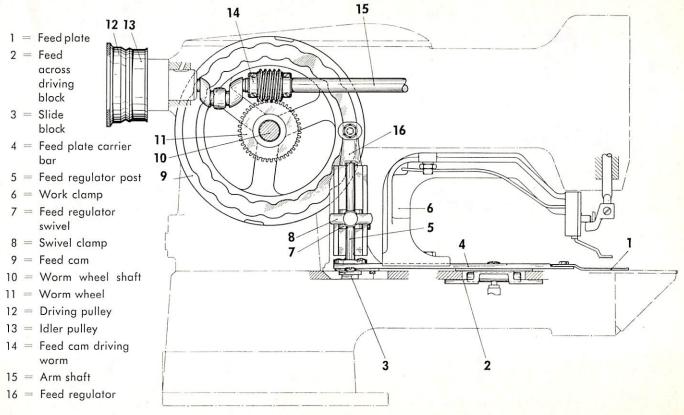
Feed lengthwise motion (longitudinal section) From the library of: Superior Sewing Machine & Supply LLC
